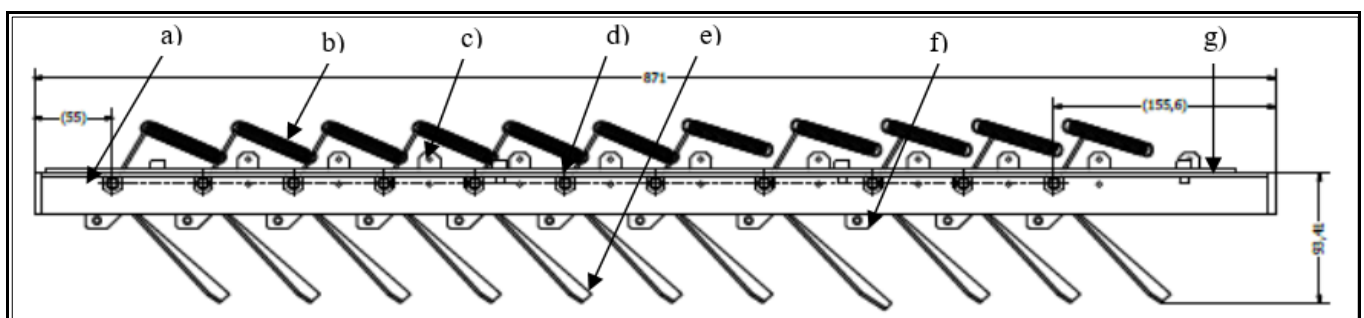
Schematic diagram of shaper bracket assembly a) Bracket plate, b) Extension service springs, c) Spring plate, d) PP Bush, e) Shaper plates, f) Location pin, g) Locking plate, (All dimensions are in mm)
